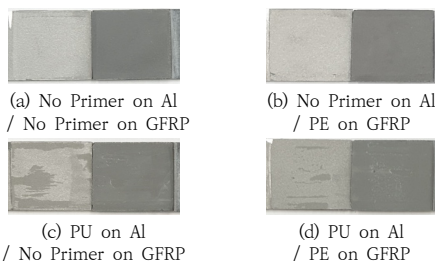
Fractured surfaces of specimens where aluminium is sanded with sand blast and GFRP with sand paper
